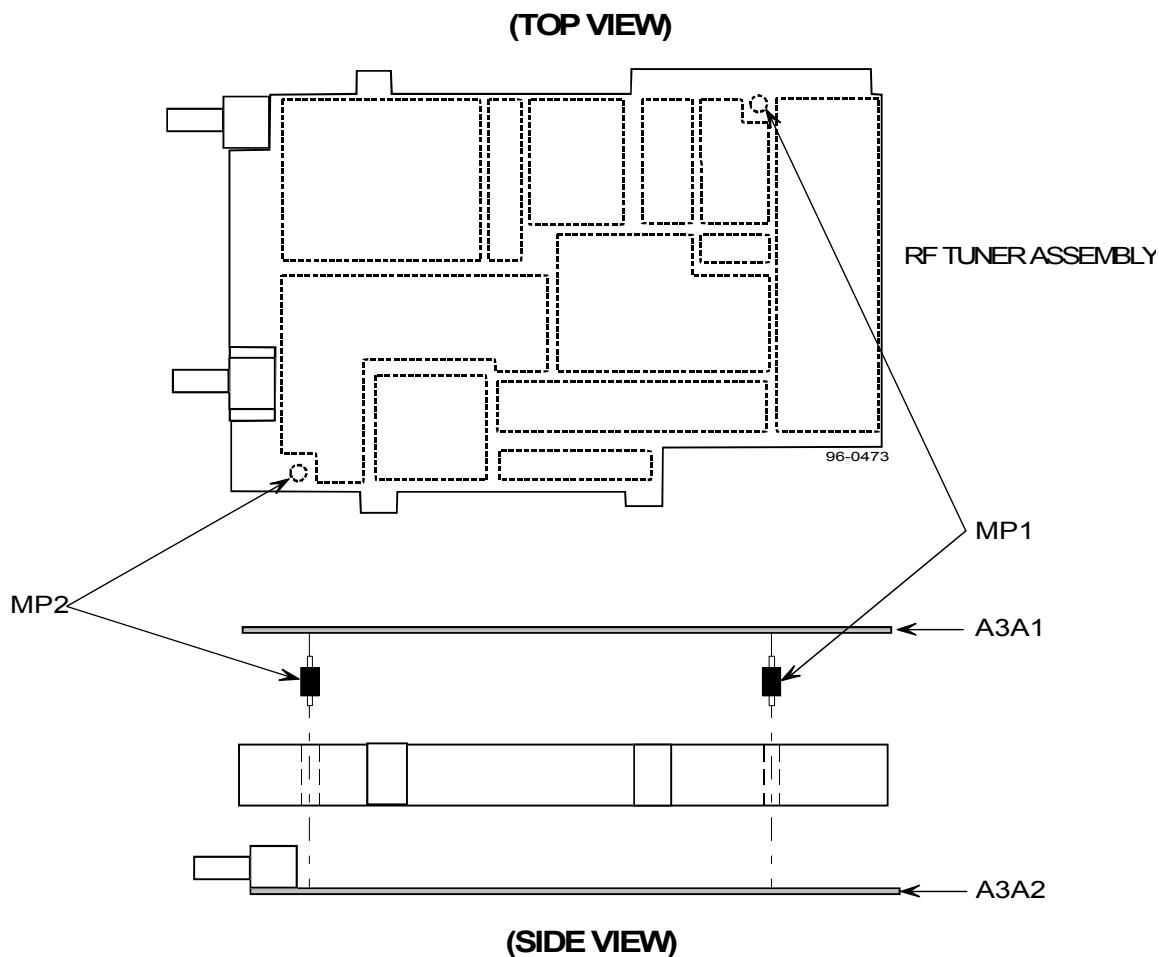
Type 797228-1 RF Tuner Assembly, Component Location
